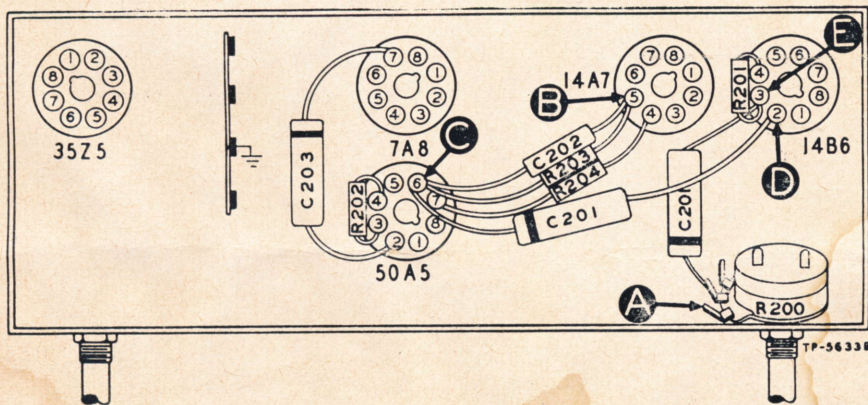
BOTTOM VIEW, SHOWING SECTION 2 TEST POINTS
